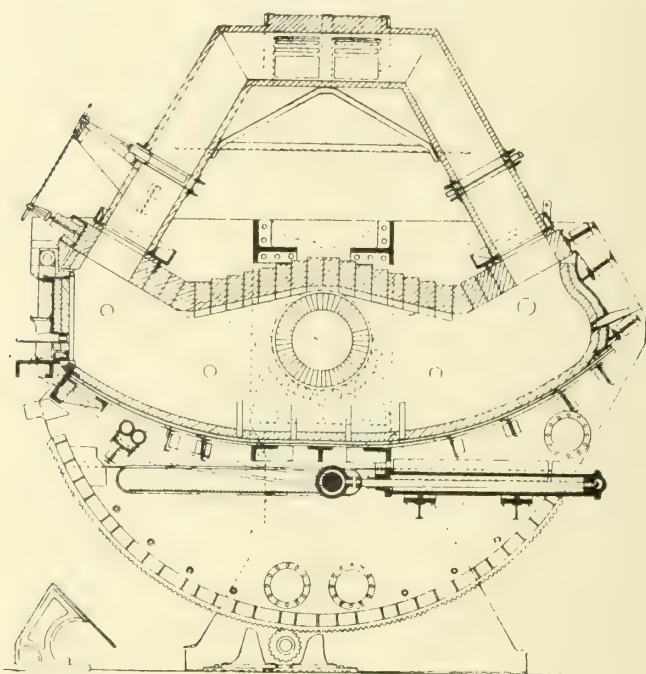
ROE PUDDLING MACHINE. CROSS SECTION.
